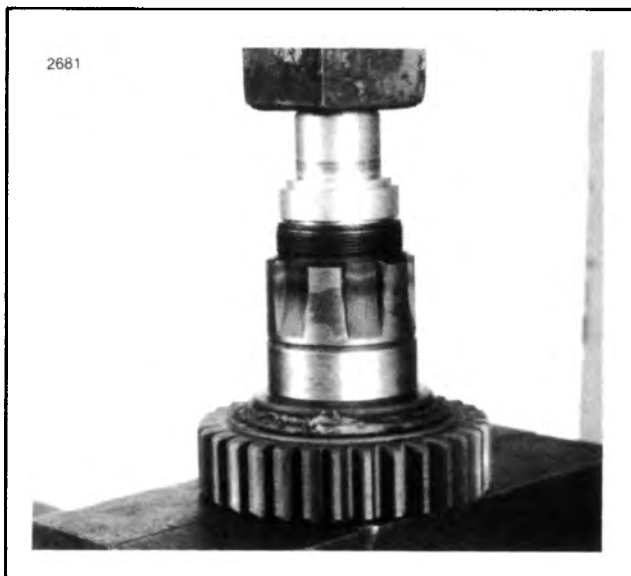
Installing Clutch Side Needle Bearing in main drive gear
